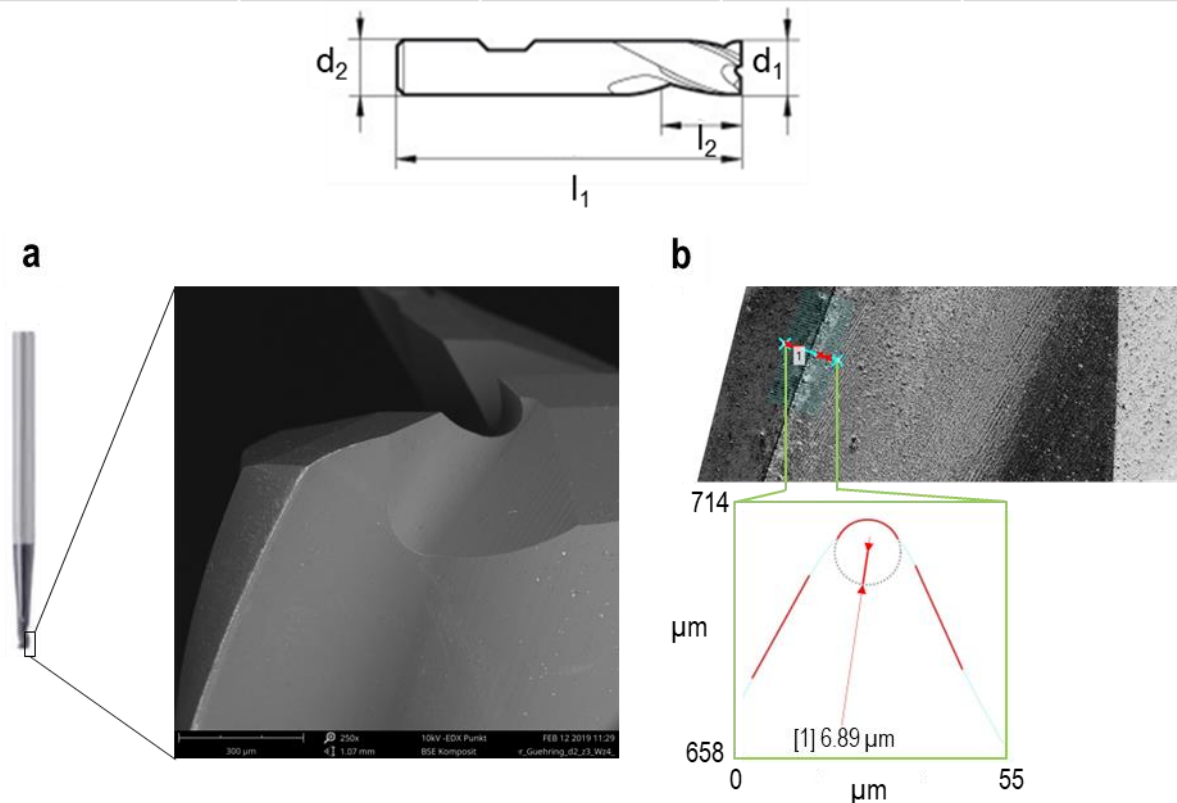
a) SEM image of cutting tool, b) cutting-edge radius.
